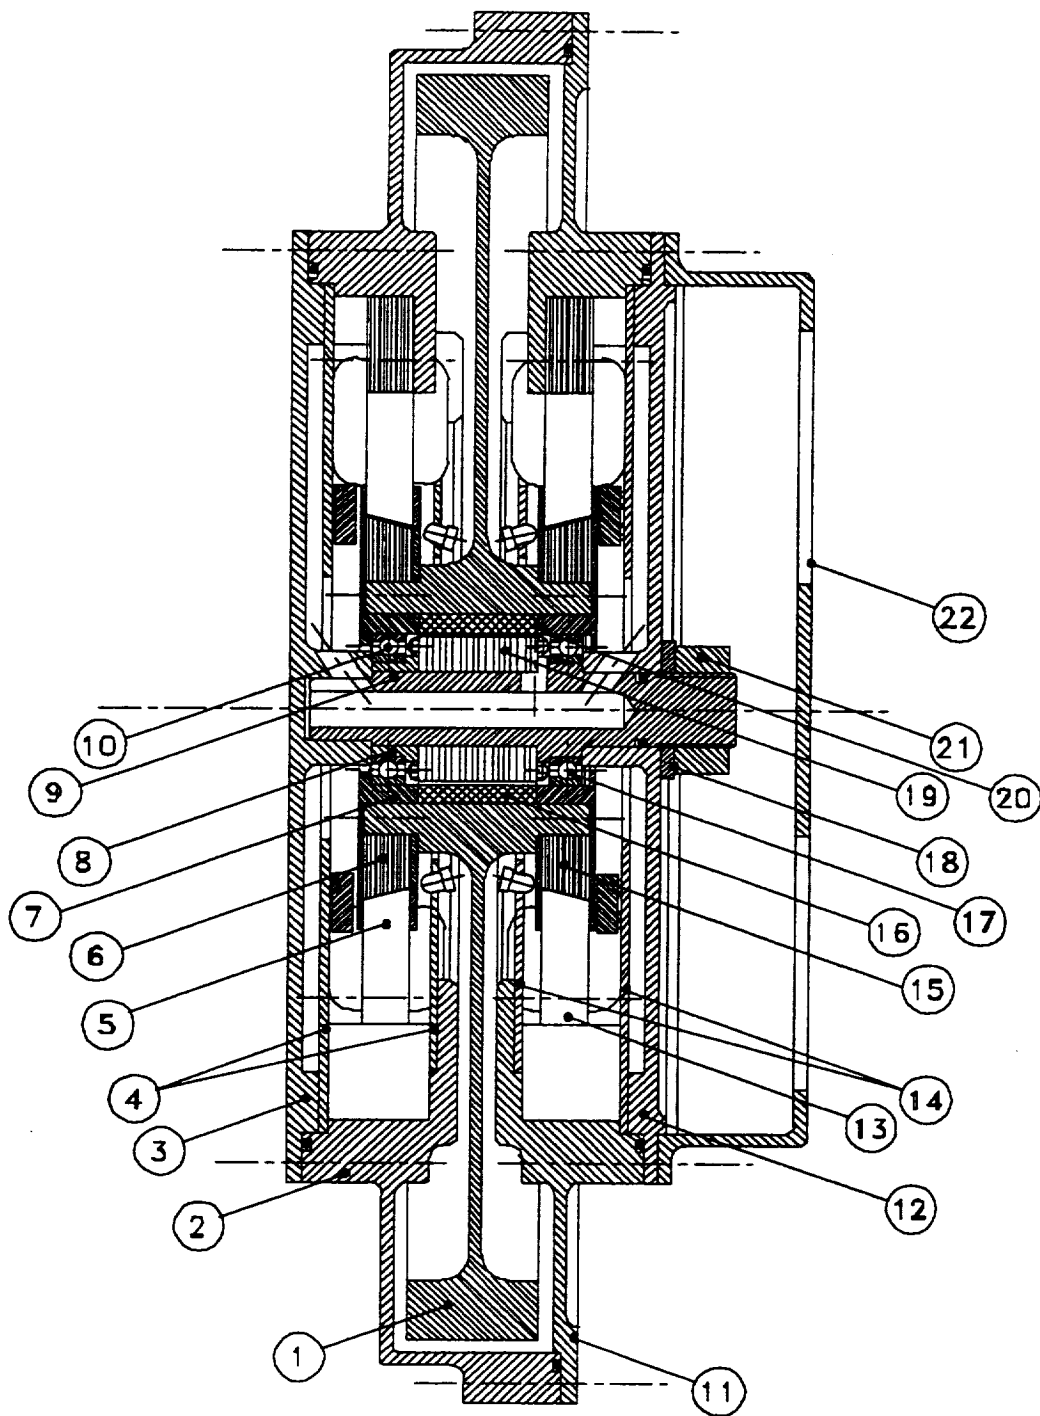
Reaction wheel section drawing (not to scale) with part numbers.
